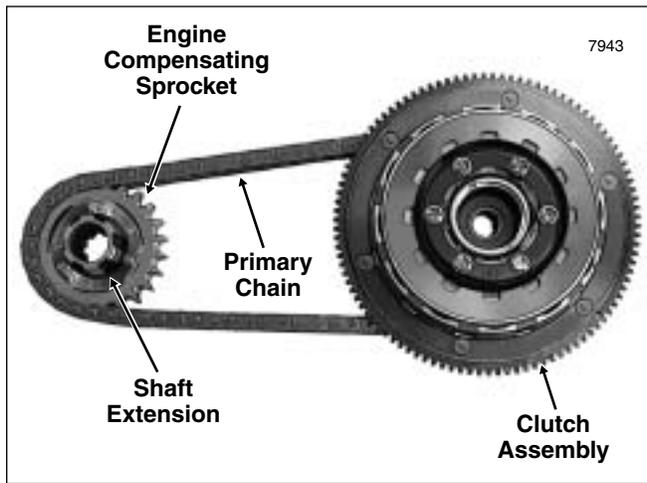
Remove Clutch Assembly, Primary Chain, Engine Compensating Sprocket and Shaft Extension
